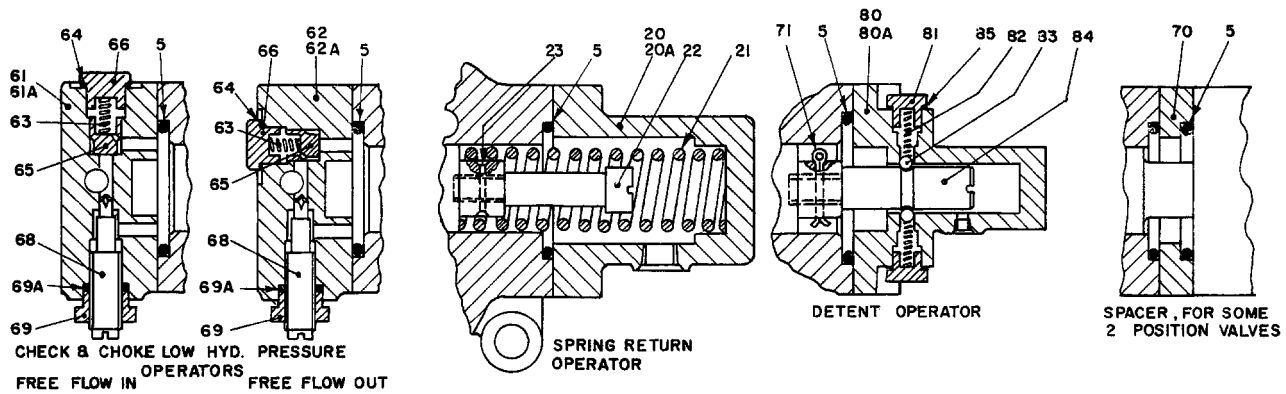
Parts drawing of Oilgear type "L" & "V" 3-way and 4-way valves (507008B Sheet 2).
